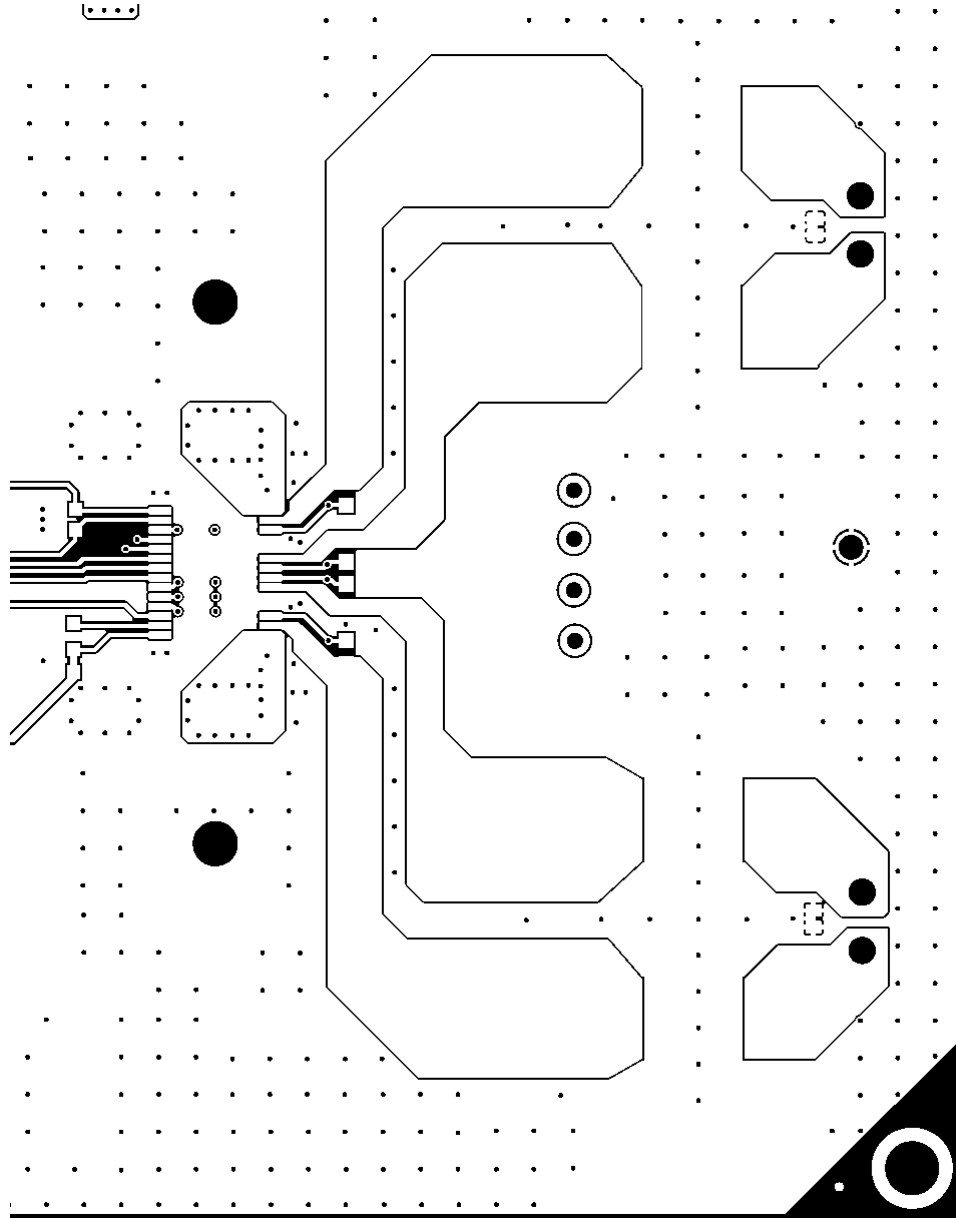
2.0 (Stereo BTL) PCB Top Layer Plot (Top View)
